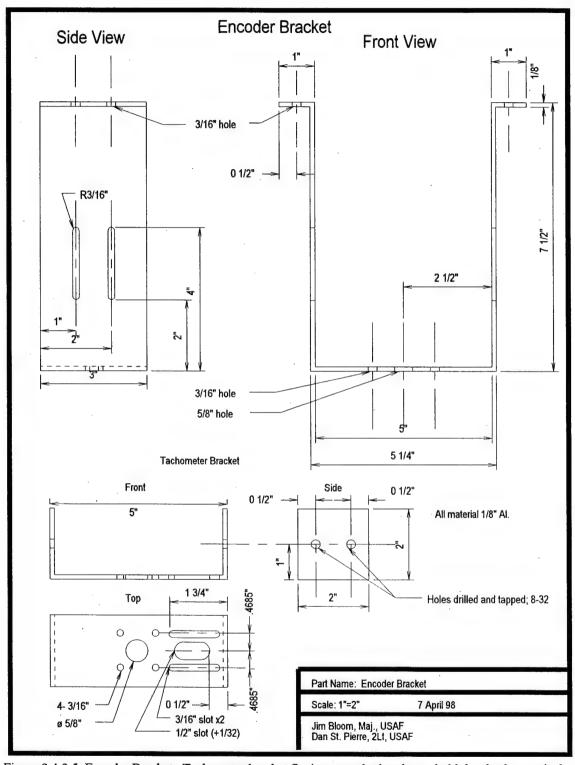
Encoder Bracket. Tachometer bracket fits into encoder bracket to hold the absolute optical encoder and the position tachometer the bottom to the middle shelf (Figure 3.4.2.4)
